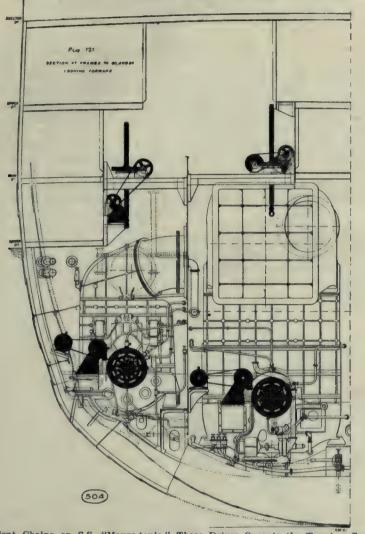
Silent Chains on S.S. "Maure tania." These Drives Operate the Turning Gears for the Propeller Shafts and Turbines Respectively.
